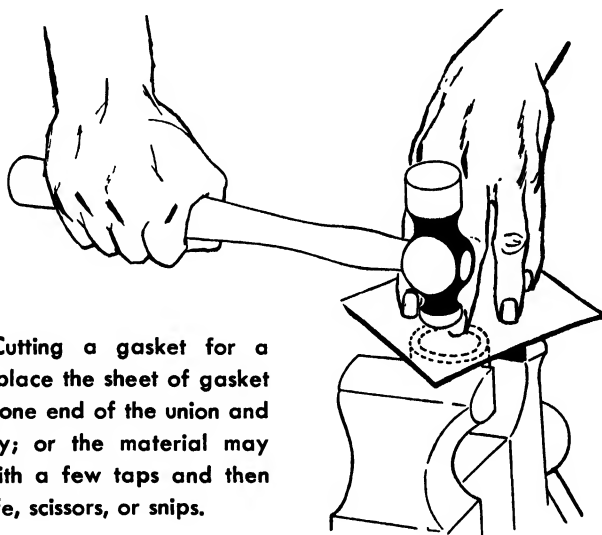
Cutting a gasket for a union. To cut, place the sheet of gasket material over one end of the union and hammer lightly; or the material may be marked with a few taps and then cut with a knife, scissors, or snips.
